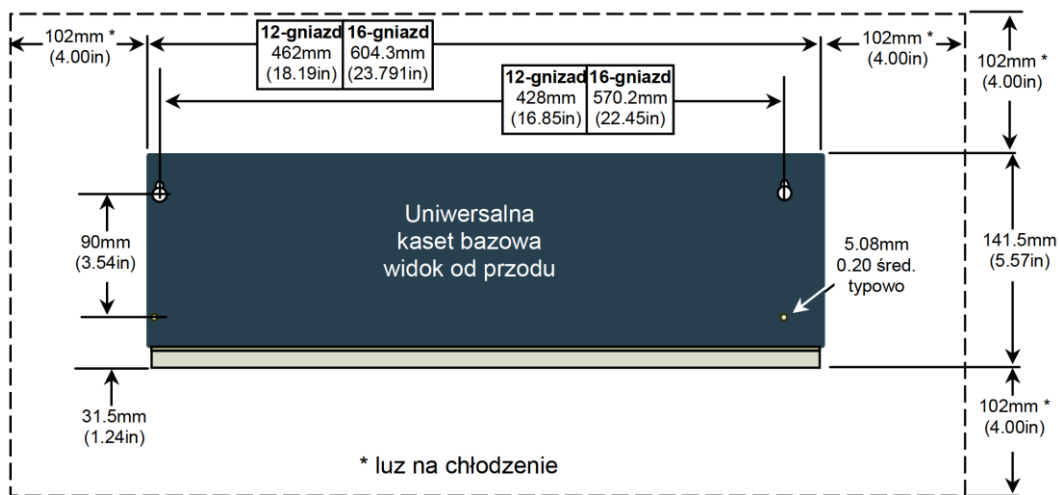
Dimensions of the RX3i universal base cassette and layout in the enclosure
